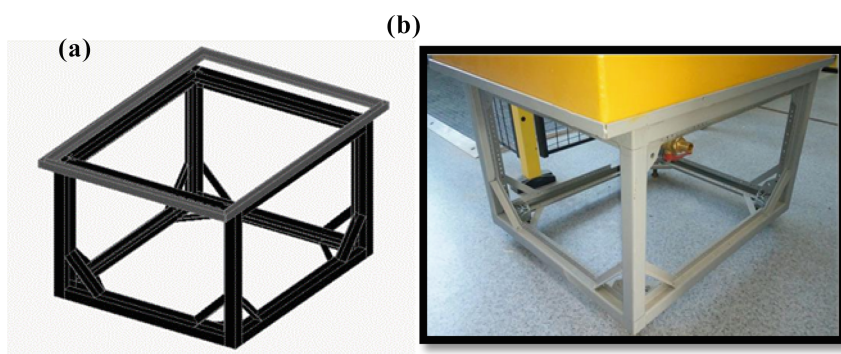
Installation stand (a) – 3D view; (b) – photo of the installation stand *Source:* developed and compiled by the authors
